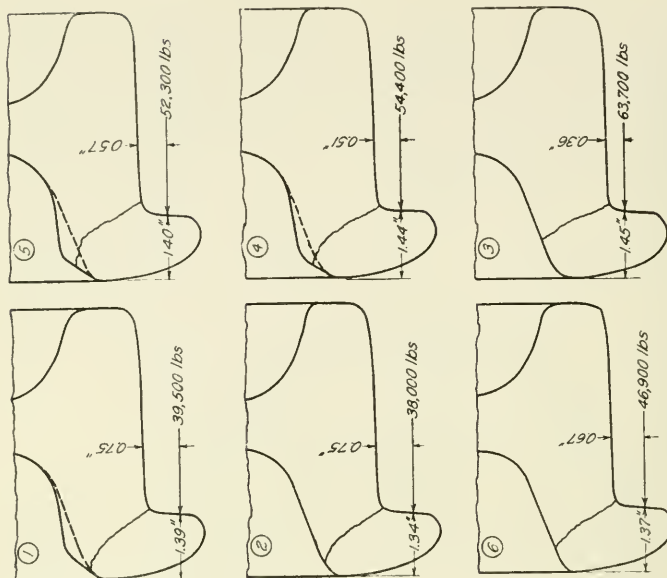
960-LB. ARCH PLATE WHEEL No. 659 338 BROKEN THROUGH PLATE BY FLANGE PRESSURE
